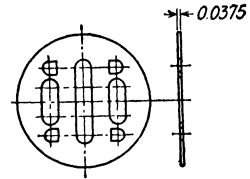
A hard rolled-steel disk containing slots and holes. This piece is scheduled for mass production.
